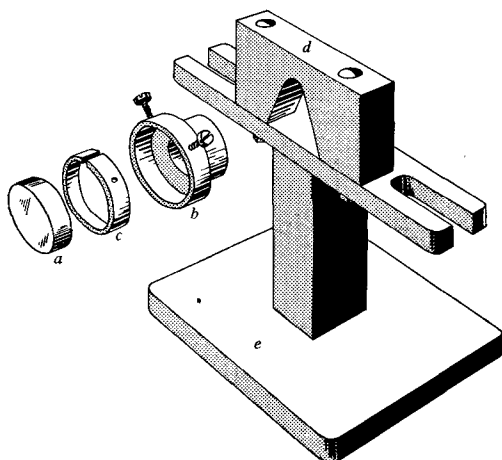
Exploded oblique projection of clamping jig: The araldite block (a) is clamped in a cylindrical metal holder (b) by a screw-adjusted split collar (c), the shoulder of which is secured by a V-block (d) to a steel pillar (e); this in turn rests on the magnetic chuck of a rock saw. 1/3.6 natural size.
